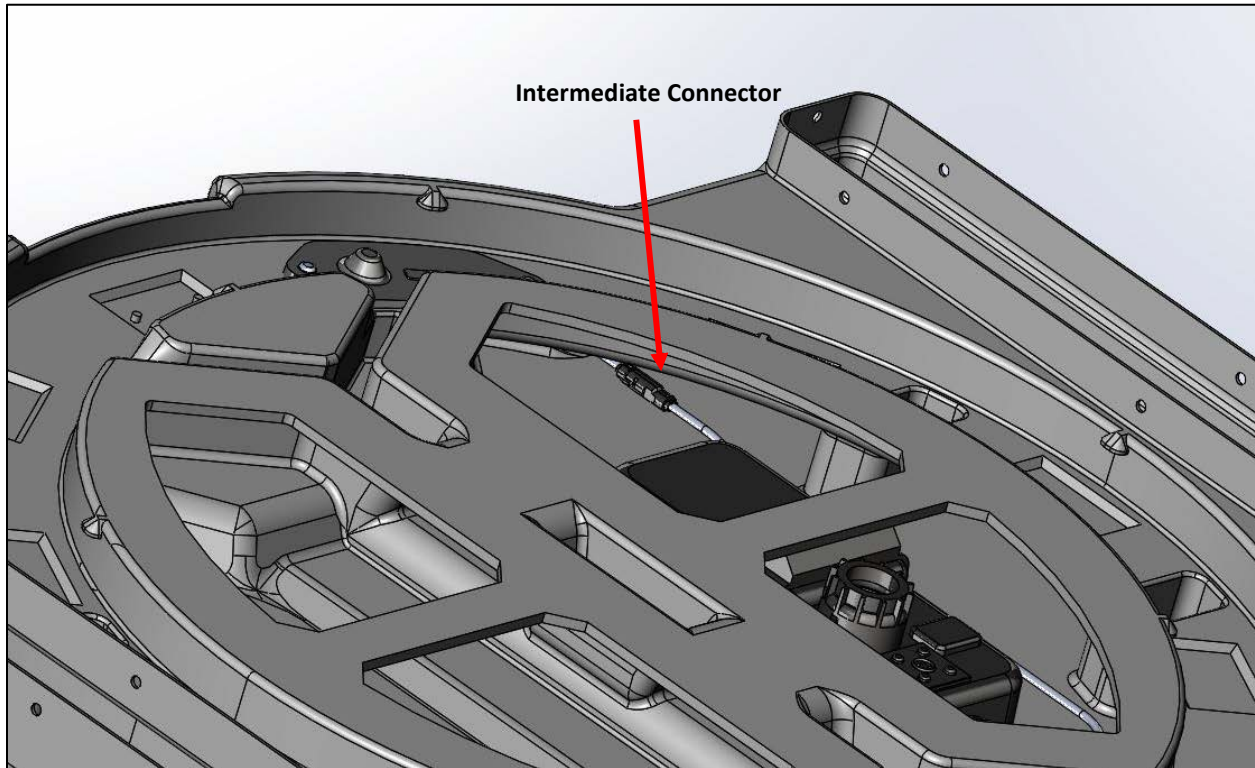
Sensor Pad to Hatch Sensor Unit Cable Connection
